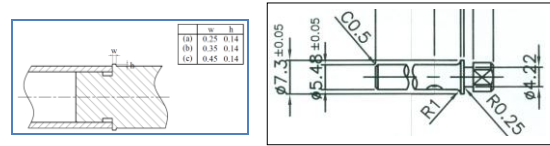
Weld joint design for SFR fuel elements closures
